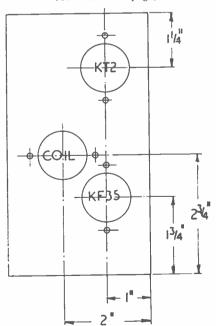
Showing dimensions of coil and valve holder fittings for compartment "A."
